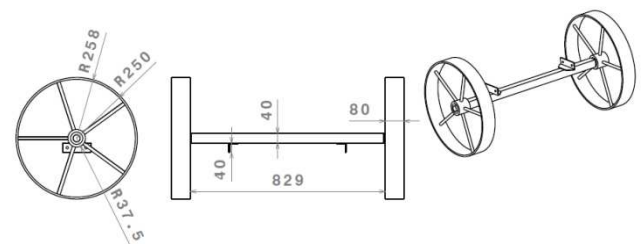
Transport wheel, (1-side view, 2-front view, 3-isometric view) (all dimensions are in mm).
